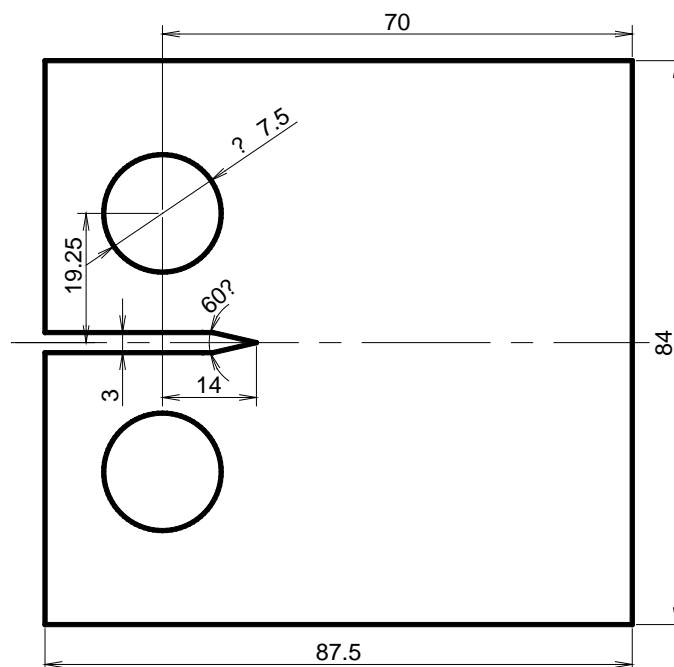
Geometry of C(T) specimen (unit: mm)
